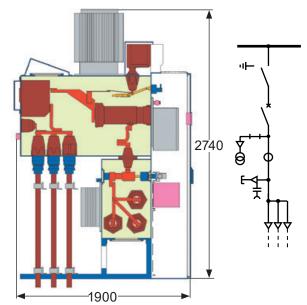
Outgoing feeder panel, 800 A, with ring core CTs or sensors
